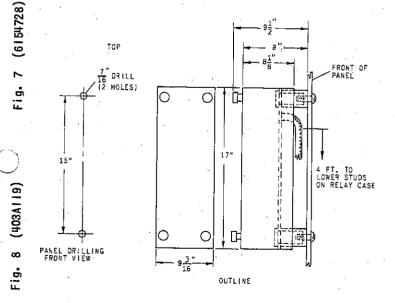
Outline and Panel Drilling for Auxiliary Box
